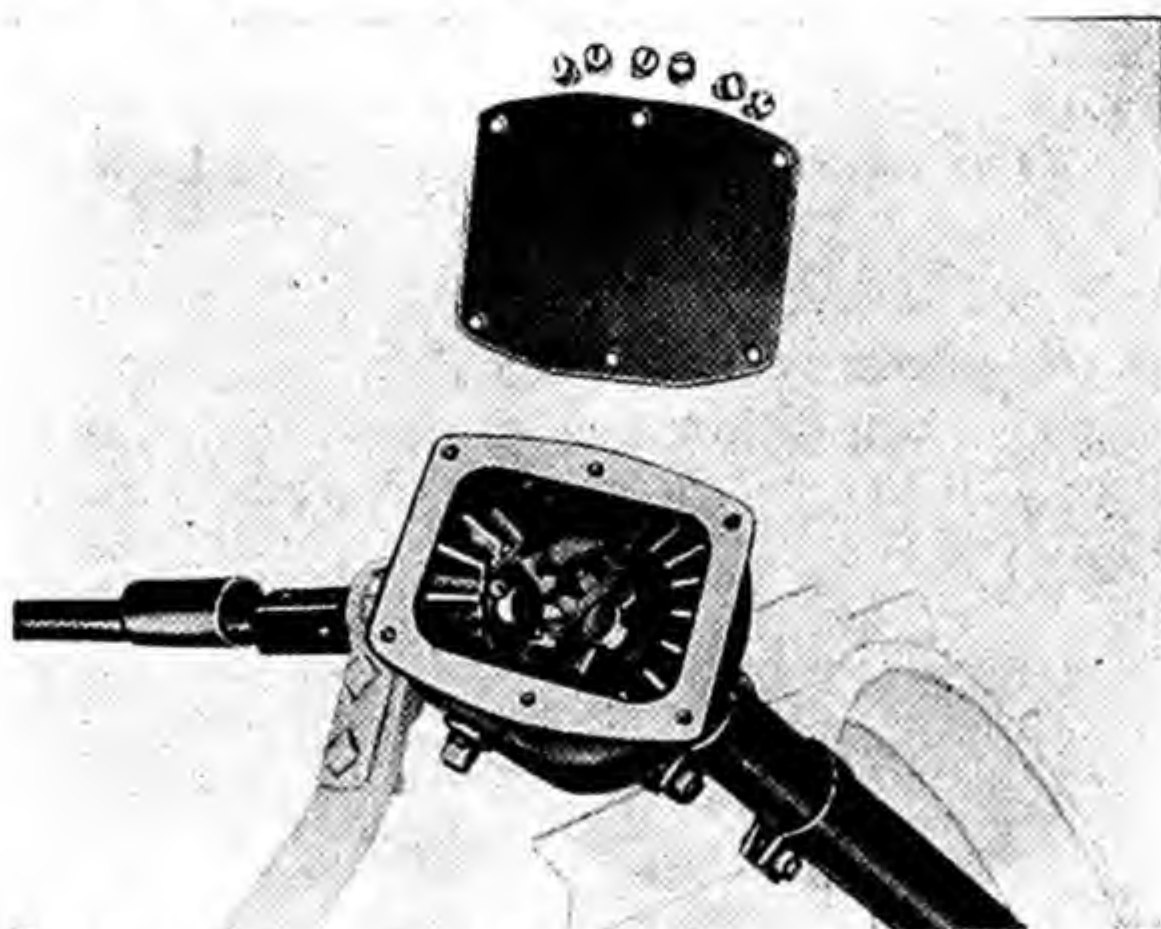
Drive for the rod on a rod weeder. Note the gear for reversing direction of rotation and the universal joint.
